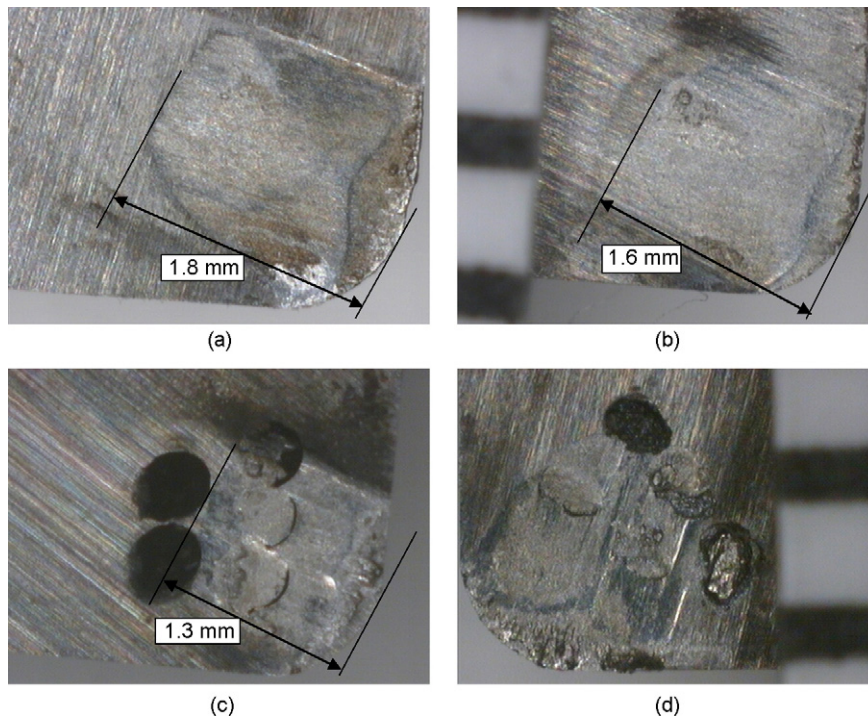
Optical images of the chip-tool contact area (crater wear). (a) Dry cutting; (b) flood cooling; (c) oil lubrication; (d) solid lubrication.
